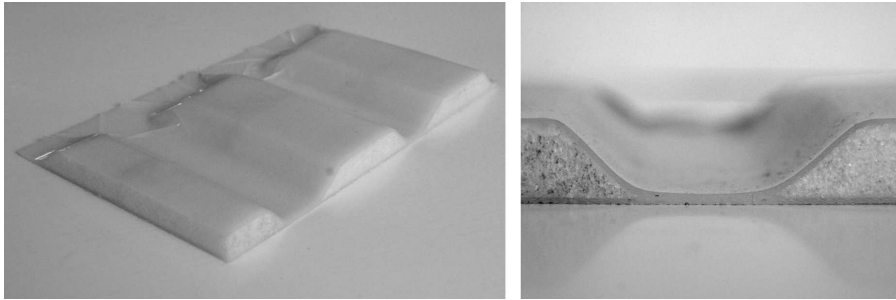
APA-6 plate with co-infused stringers, draped over PET-foam.
